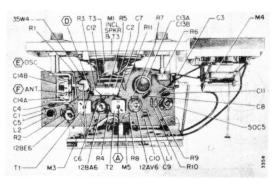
Top View of Chassis Showing Location of Components and Alignments Points.
